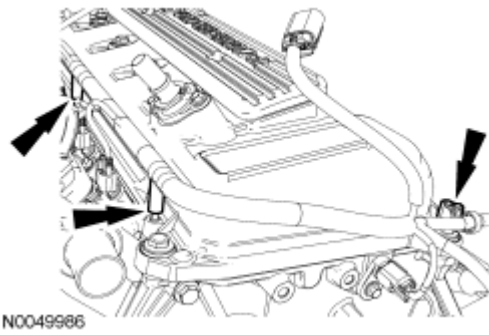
Detaching Wiring Harness Retainers From LH Valve Cover Stud Bolts
